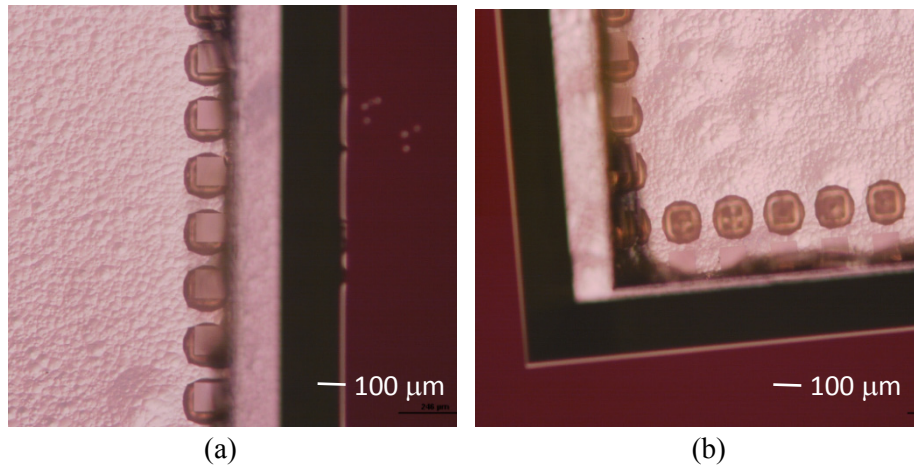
Microscopic view of assembly. (a) Successfully aligned. (b) Not aligned.
